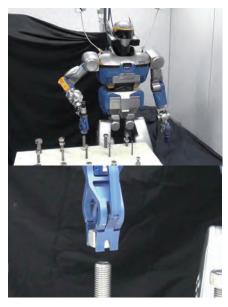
Nut screwing operation with force control (Below is an enlarged view of the robot's right "hand")
